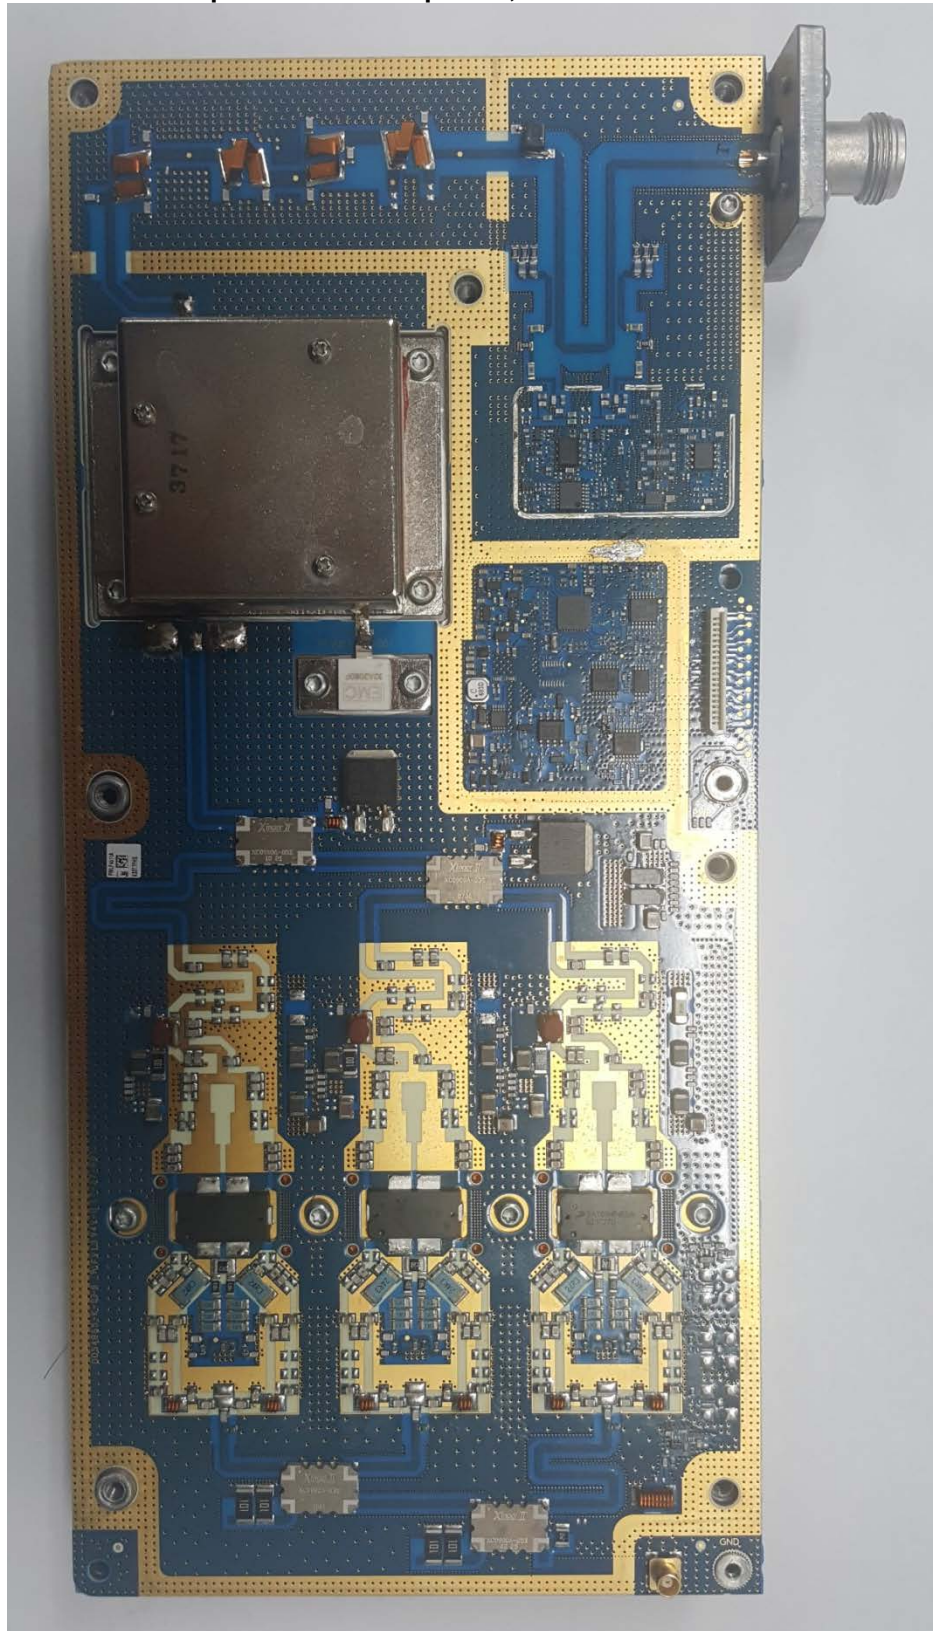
F – Internal Front View – Power Amplifier Module Bottom View, Heat Sink Removed
